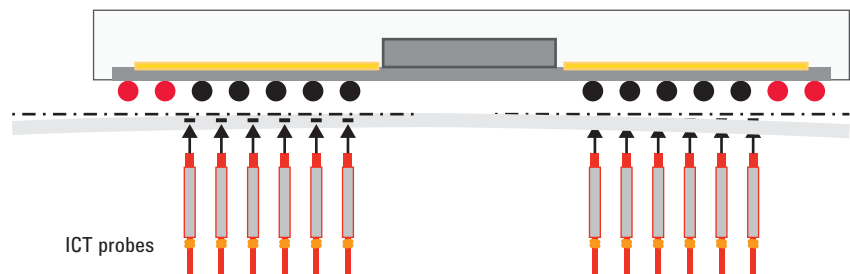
Too many ICT probes under a BGA device will cause the board to flex and strain the solder balls
